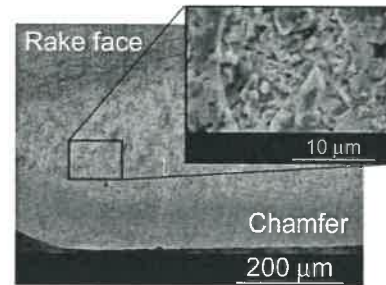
Surface of the tool with nano/micro textured surface after cutting
